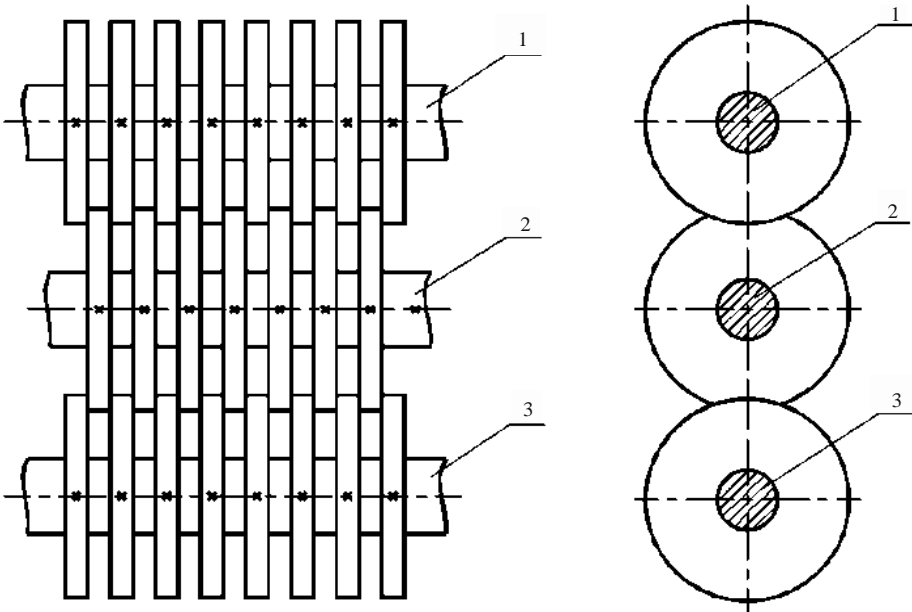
Discs: 1, 2, 3 – driven knife rollers [own study]
